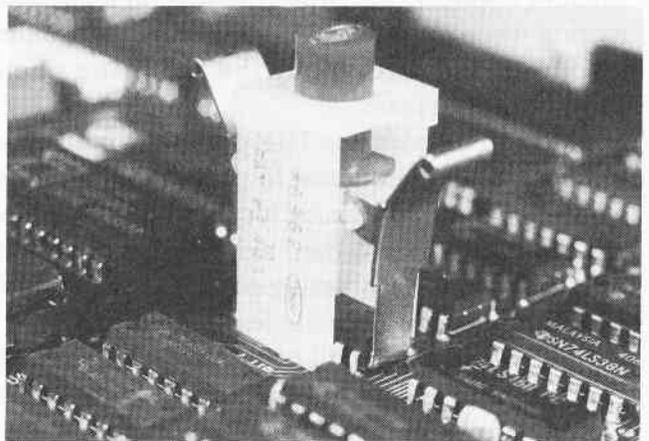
A spring-loaded dual in-line extractor tool.
